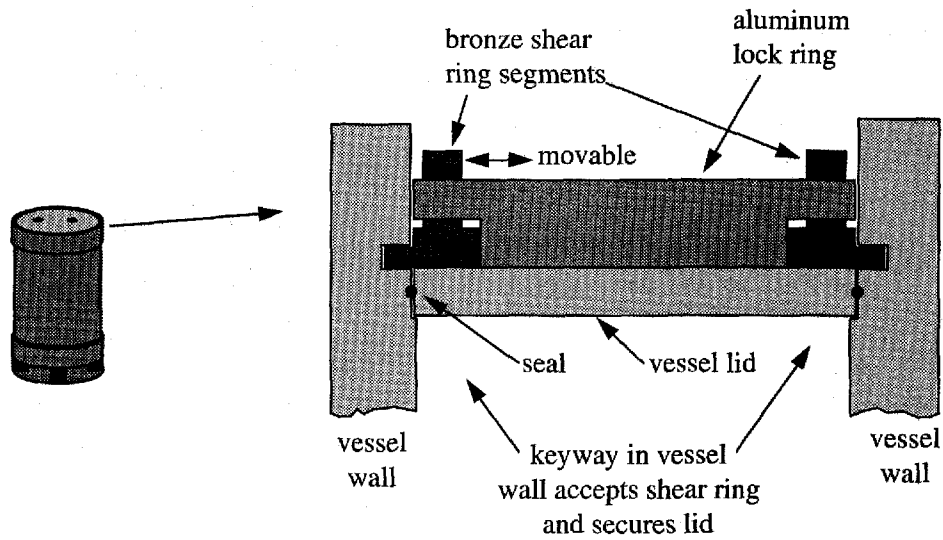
Shear Ring Assembly for Pressure Vessel Lid
